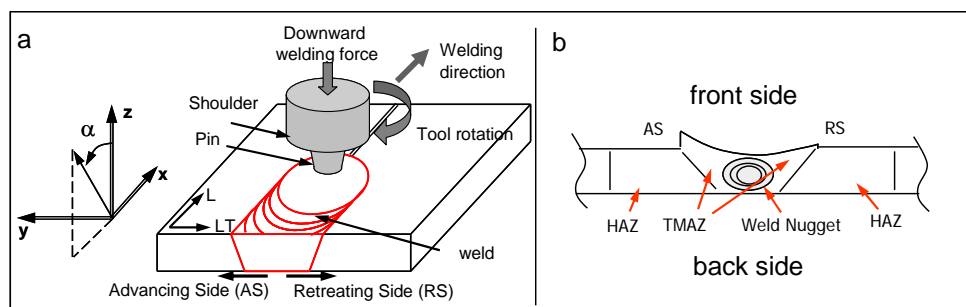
, a: FS welding process, b: cross-section of resulting FS weld
